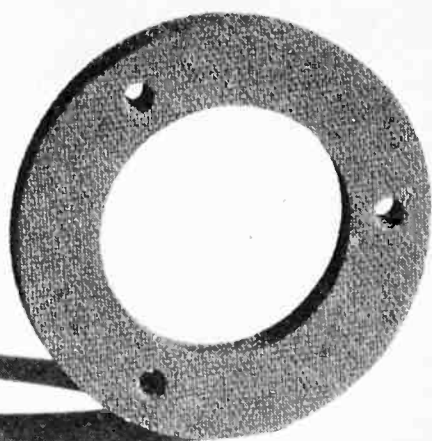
Rubber pad which is used to prevent the drive pins of Fig. 3 from resting on the glass base recording disc which is not equipped with drive holes to accommodate them
